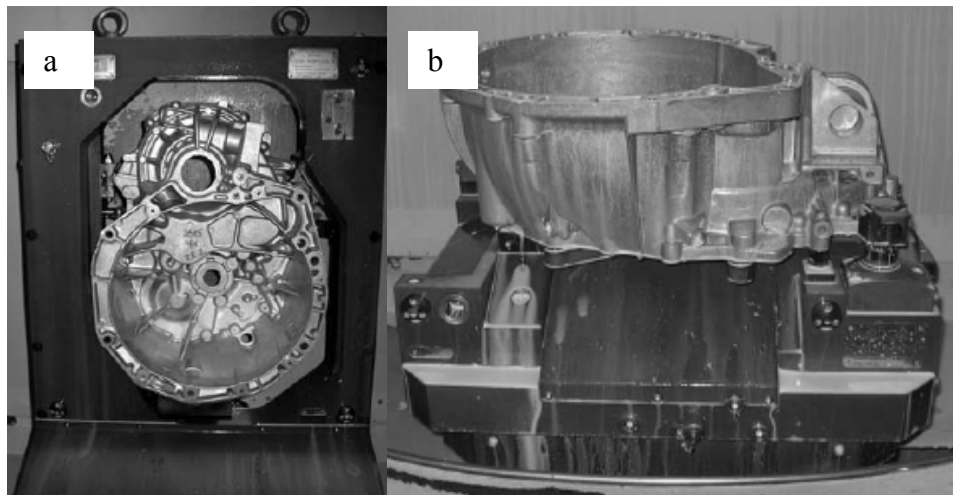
Gear box into machining centre: a) vertical assembly; b) horizontal assembly
